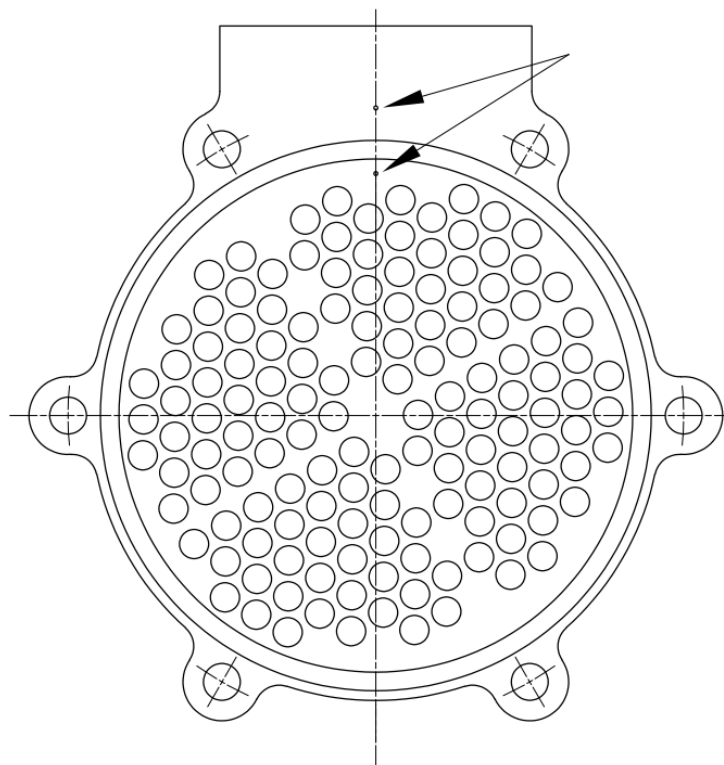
MSG 134 front view vertical alignment indication marks on tube bundle / manifold.
